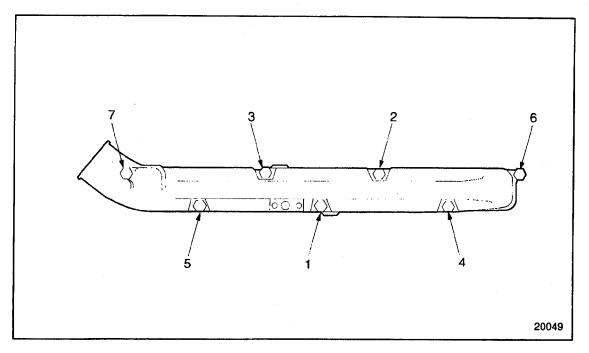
Intake Manifold Bolt Position and Torque Sequence
